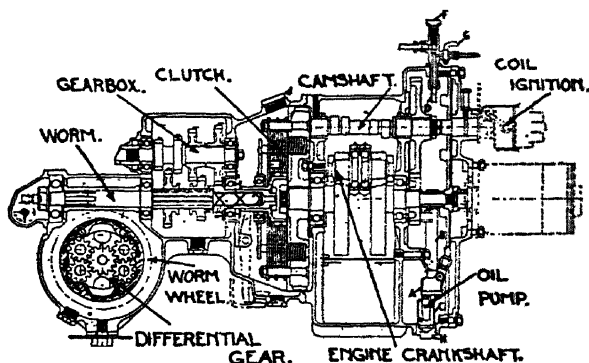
Side Sectional View of the 9 h.p. B.S.A. Front Drive, showing Crankcase, Clutch, Gearbox and Differential.
